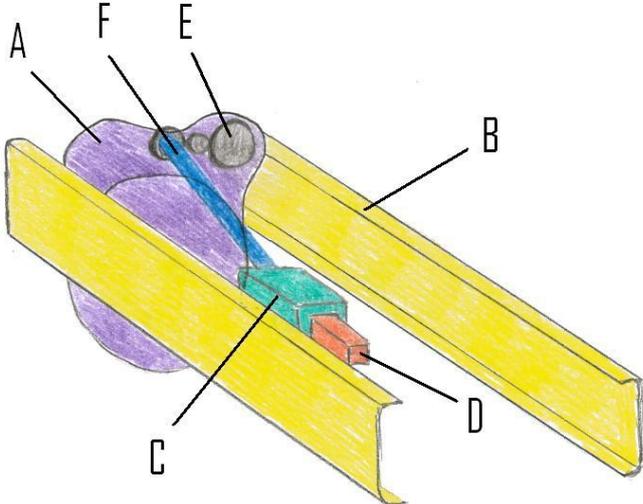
Concept 10. Both pumps are mounted on the chassis with a cardan shaft connecting pump C to a transmission, which is connected to the PTO.
